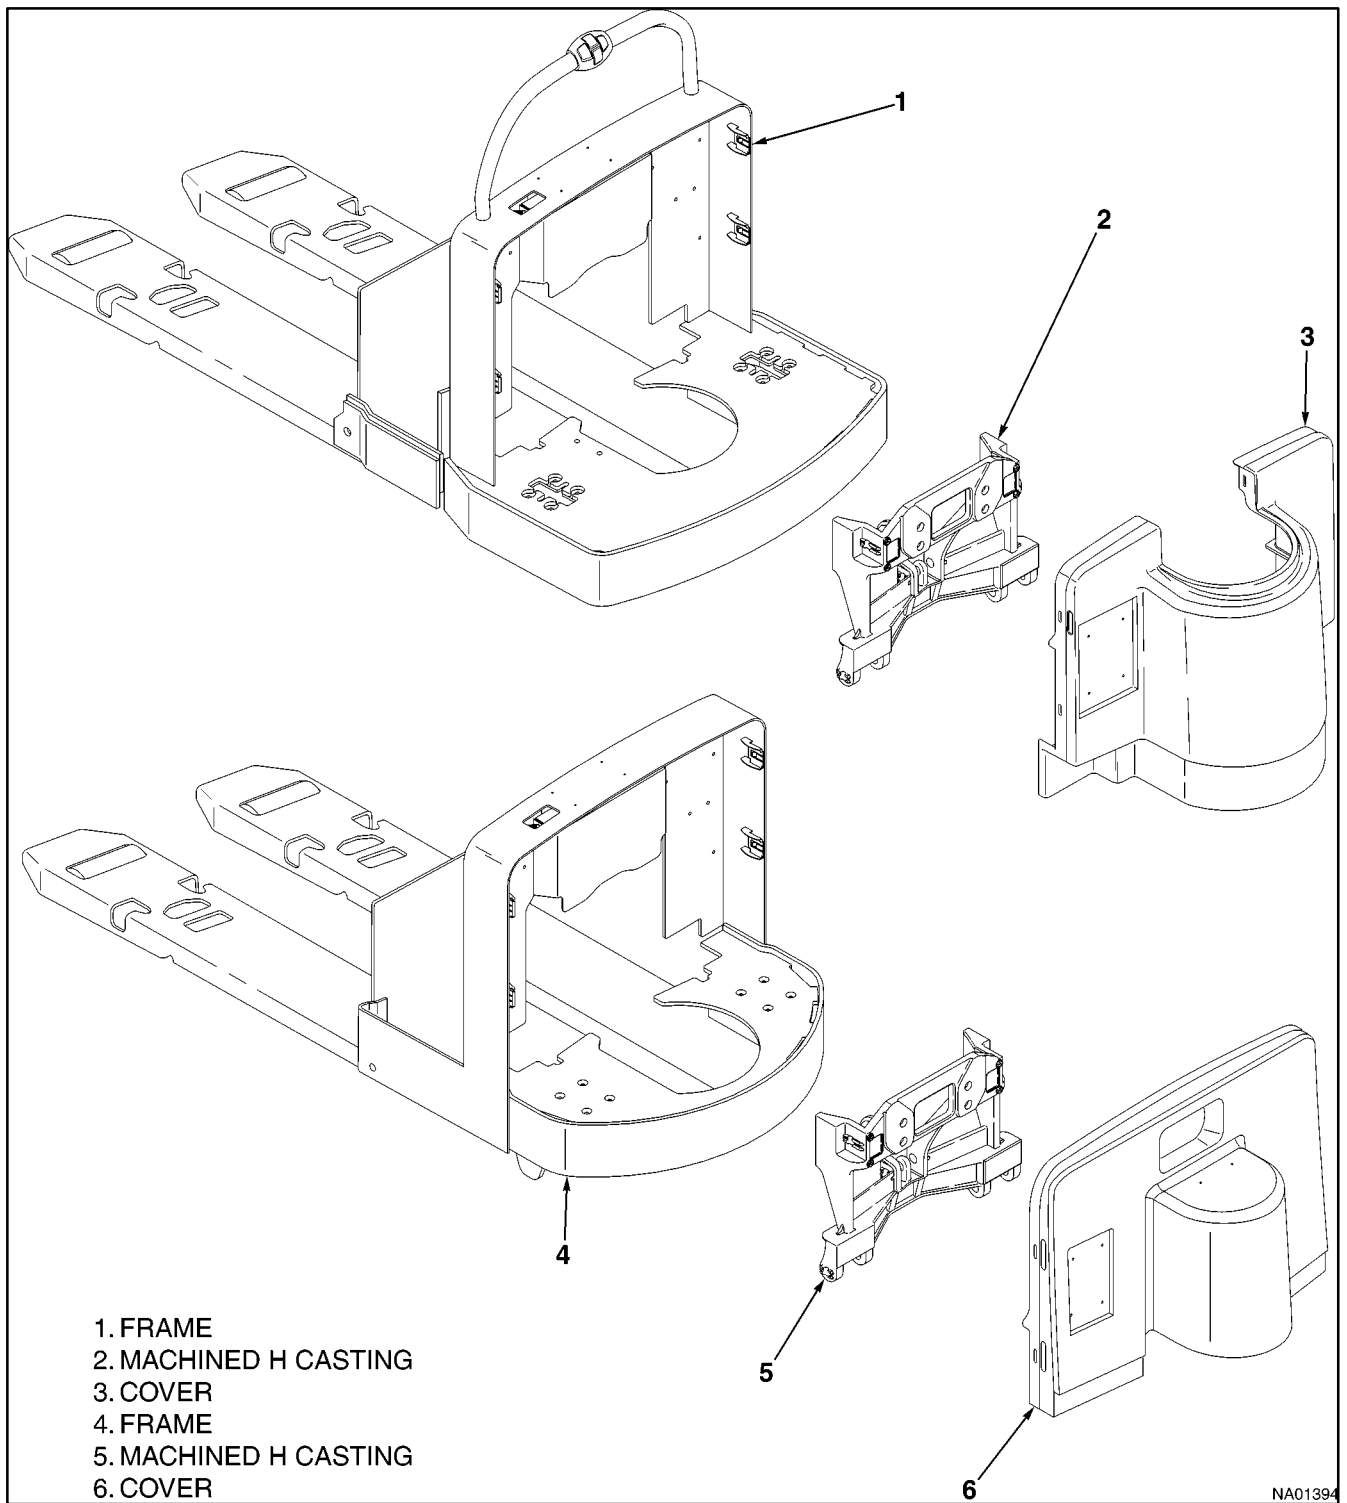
FRAME WELDMENT – B60Z, W 60Z
